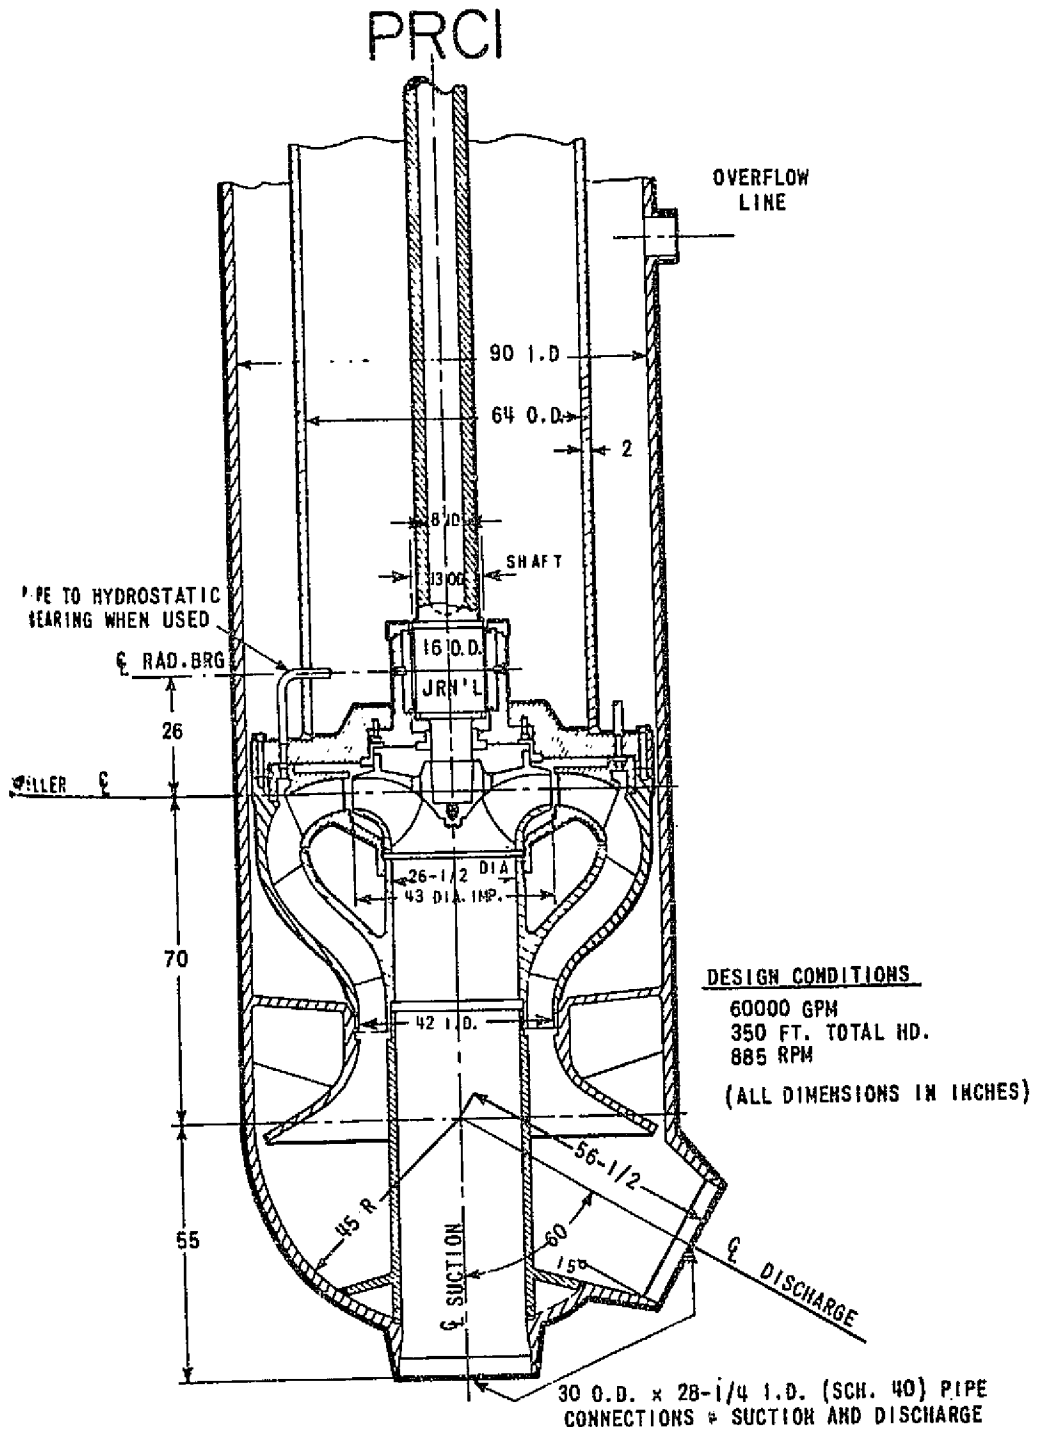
Single-suction pump (Removable concentric casing)
